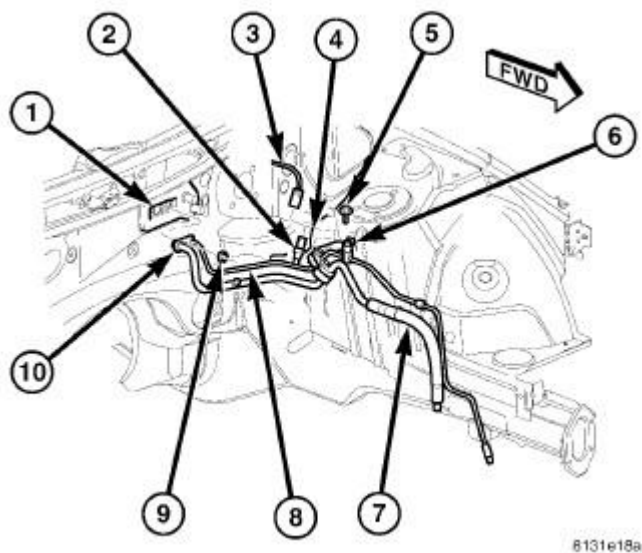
Valve-A/C Expansion-Refrigerant Lines Removal & Installation
